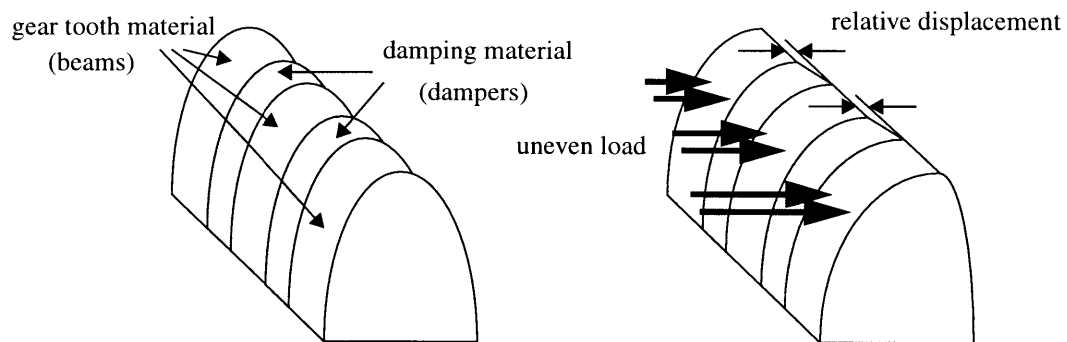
Design Concept of Bimetallic Composite Gear Tooth
